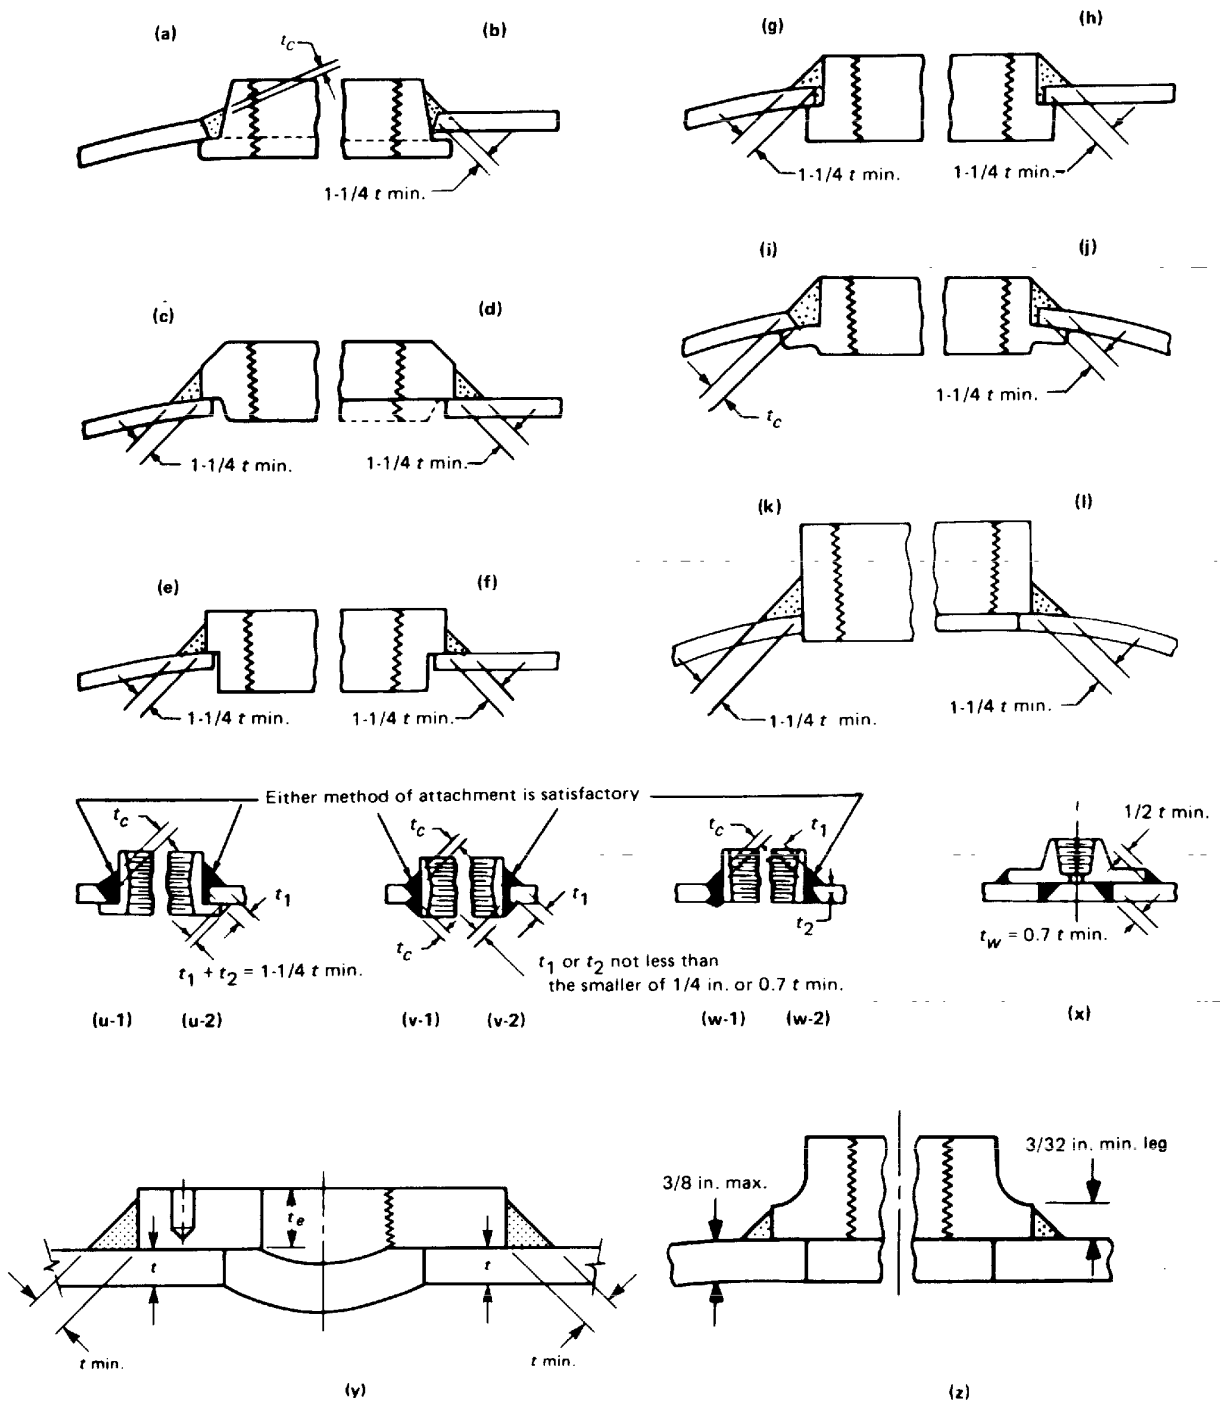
SOME ACCEPTABLE TYPES OF WELDS FOR FITTINGS, NOZZLES, AND OTHER CONNECTIONS TO SHELLS AND HEAD
